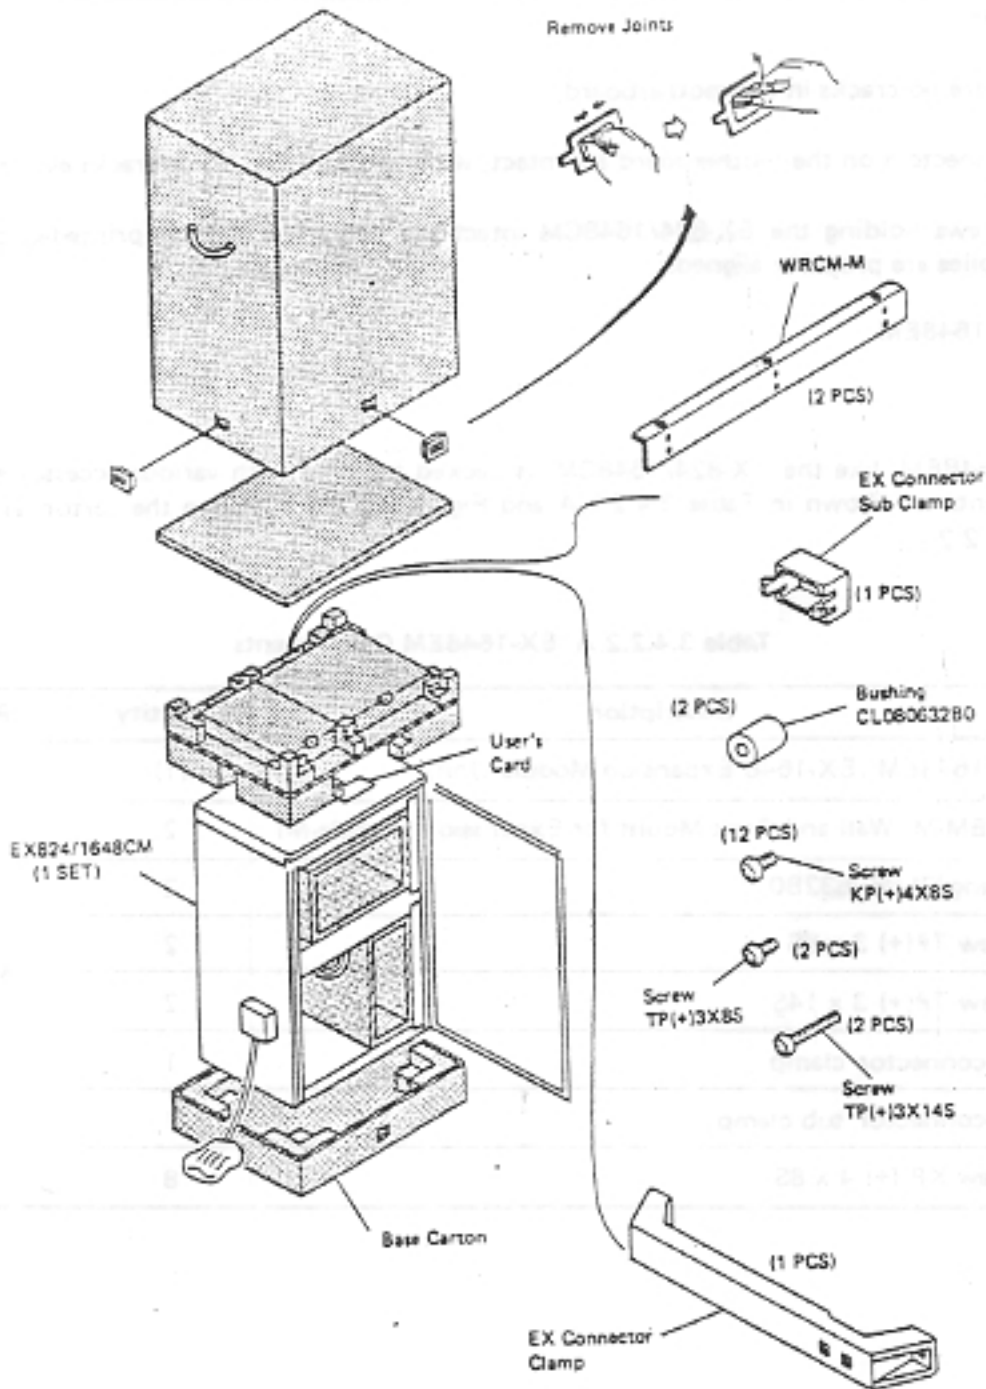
A EX-824/1648CM Unpacking and Components
